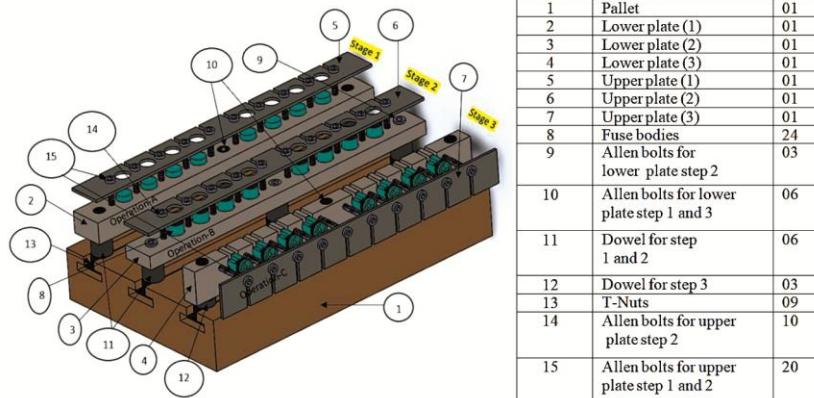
Type-B fixtures for holding 24 fuse bodies
